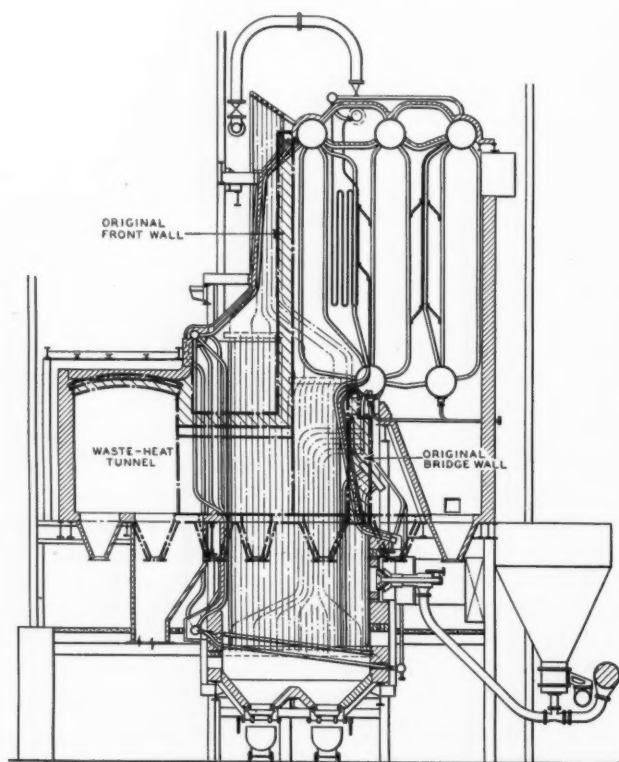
Sectional elevation of unit with outlines of original arrangement shown by heavy dot and dash lines.
